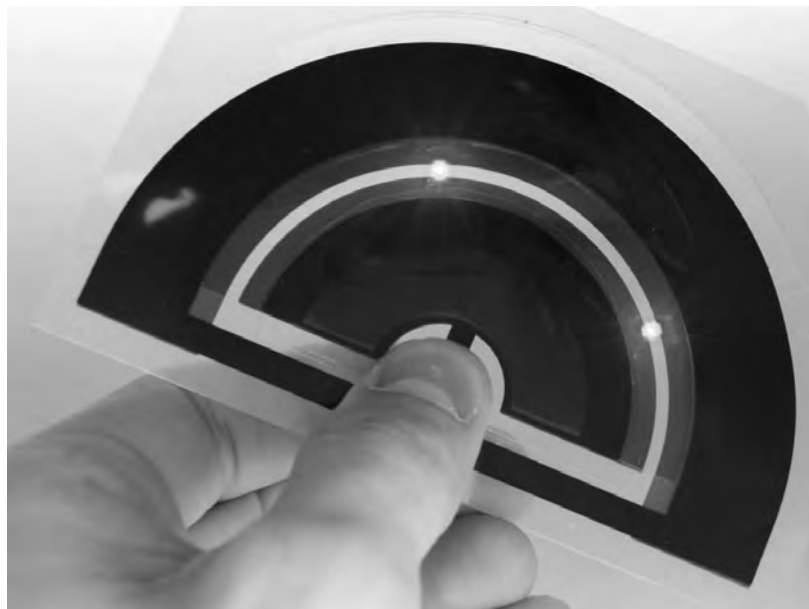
Printed battery demonstrator including two printed batteries, printed interconnects, printed push button and assembled SMD-LEDs
